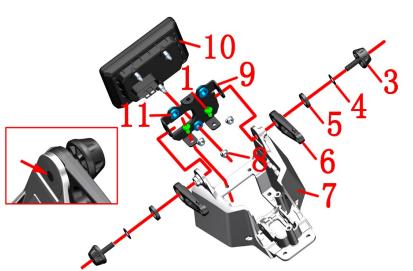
FRONT FORK COMPONENT		Head cover aluminum bracket, instrument component	CHK	40)
